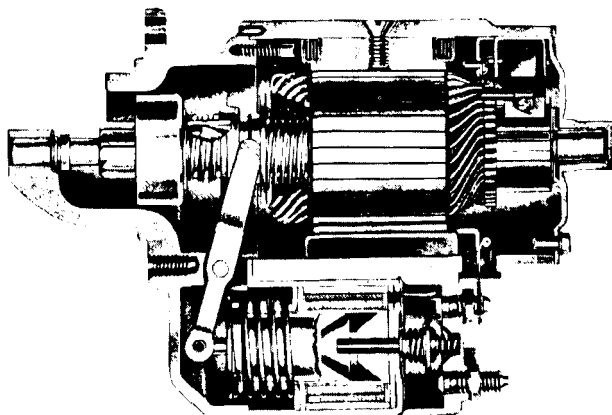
Cranking Motor with Over-Running Clutch Drive
